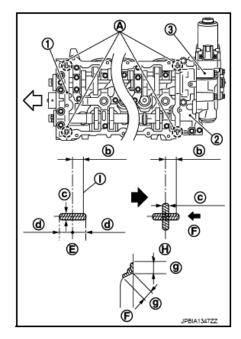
Identifying Liquid Gasket Applying Area On Rear Actuator Bracket And VVEL Actuator Sub Assembly
